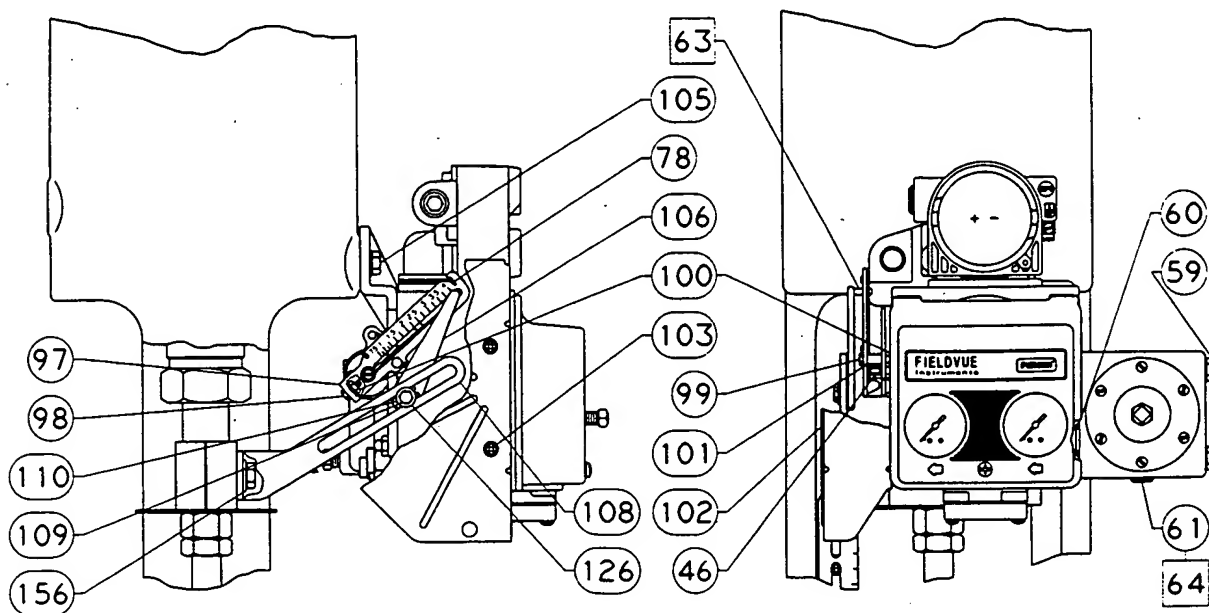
Type DVC5010 Series Digital Valve Controller mounted on Type 657/667 Size 70-100 Actuator with Integrally Mounted Filter Regulator
